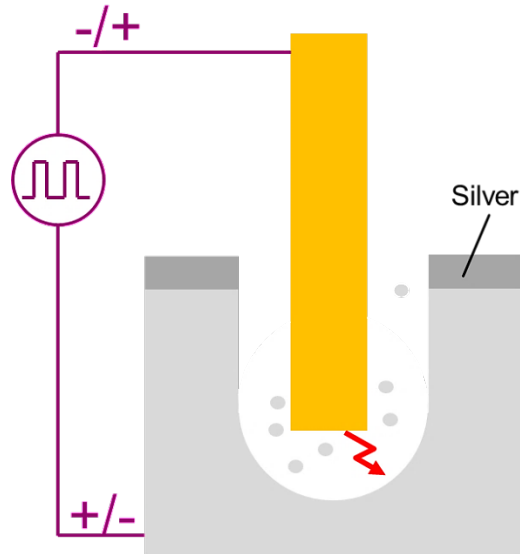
SiC machining conditions. The workpiece electrode is coated with a silver layer in order to initiate the erosion process.
